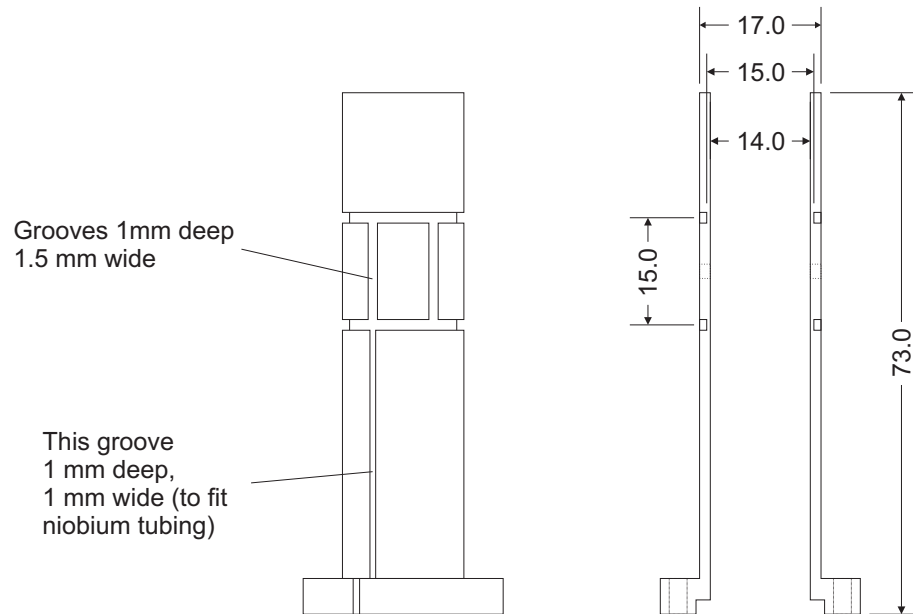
A technical drawing of the Kel-F receiver coil showing relevant dimensions.
